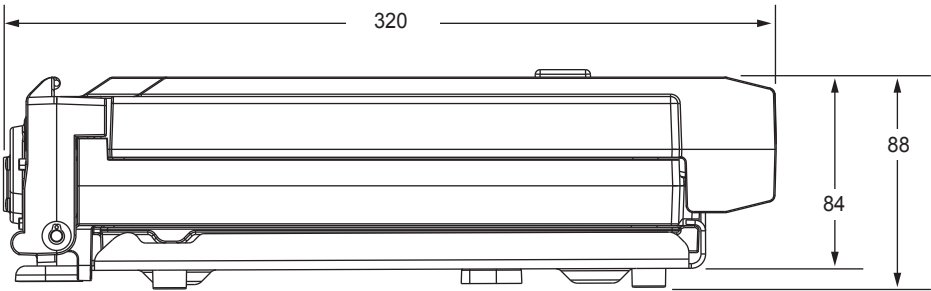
Front View of O2 Control Head with Remote Mount and Trunnion
